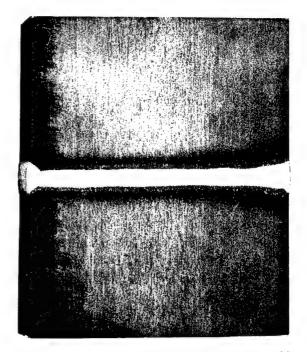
Completed single-pass electron beam weld in 2%-inch 2219-T87 aluminum alloy plate.
